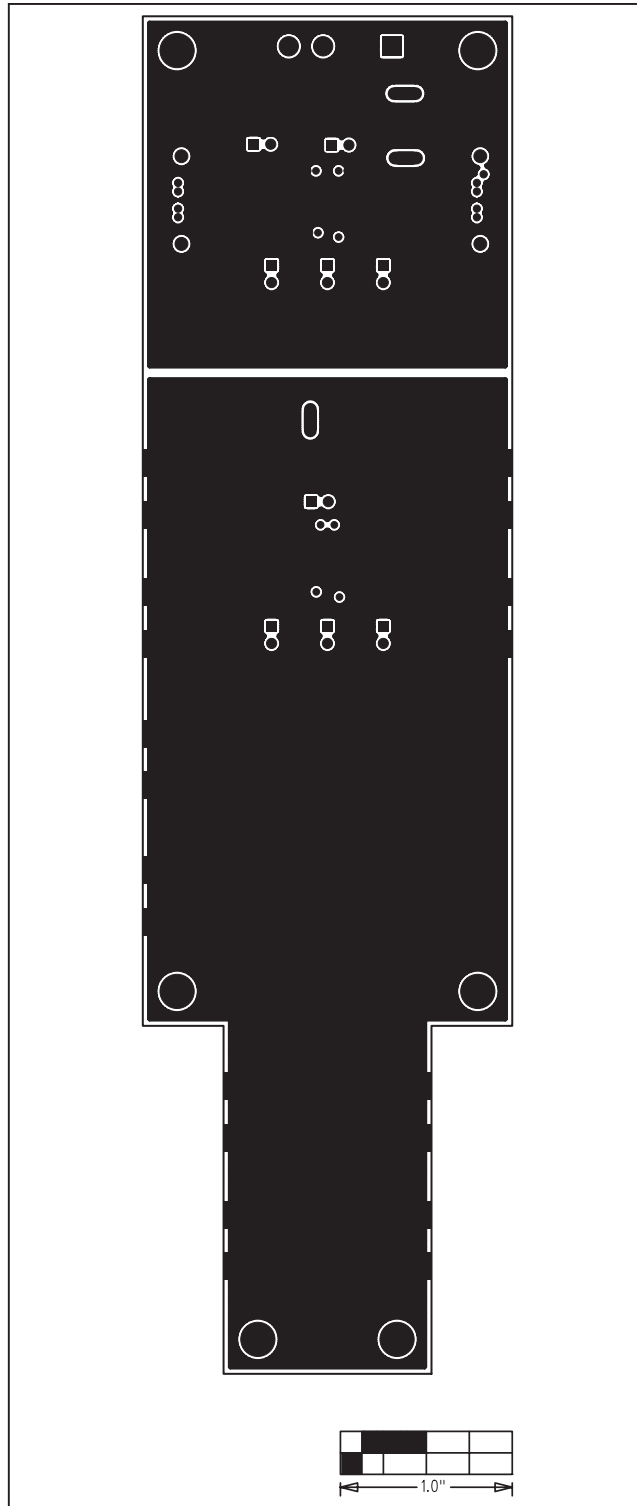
MAX4951B EV Kit PCB Layout—Solder Side
